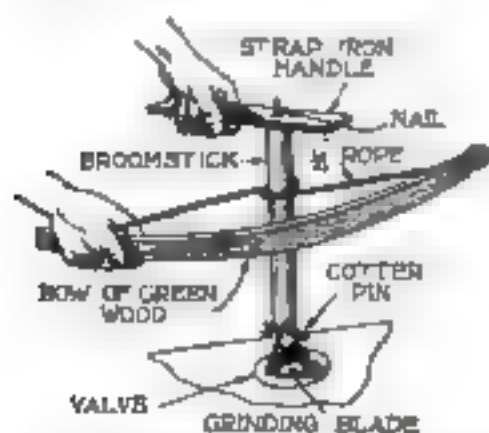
This simple valve grinding outfit will do good work and is easy to make. The bow should have just enough tension to keep the rope taut.
